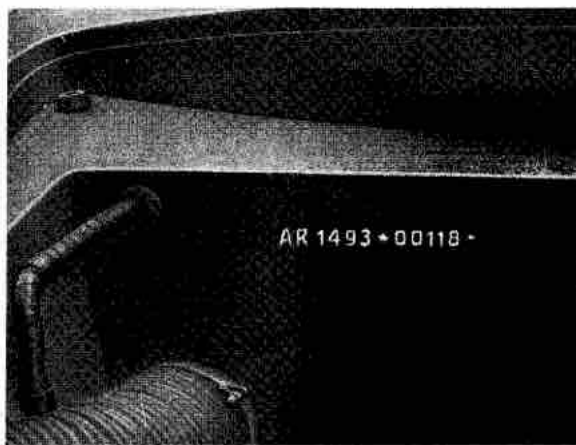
The chassis number is stamped on the right hand side of the scuttle behind the engine.
